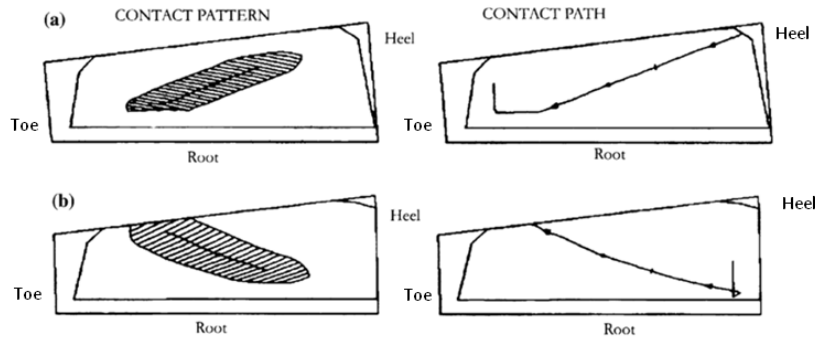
Contact pattern of spiral bevel gears, (a) gear tooth and (b) pinion tooth (F.L. Litvin, 2006)
